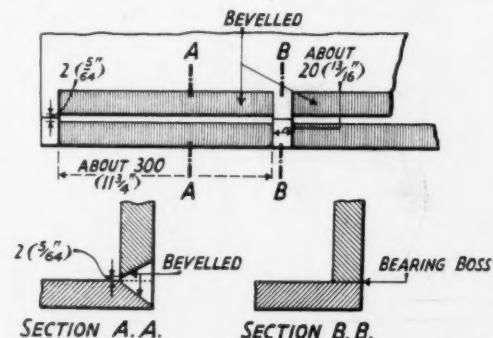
Temporary bearing bosses (subsequently replaced by welds) prevent deformation of angle-joints by shrinkage
